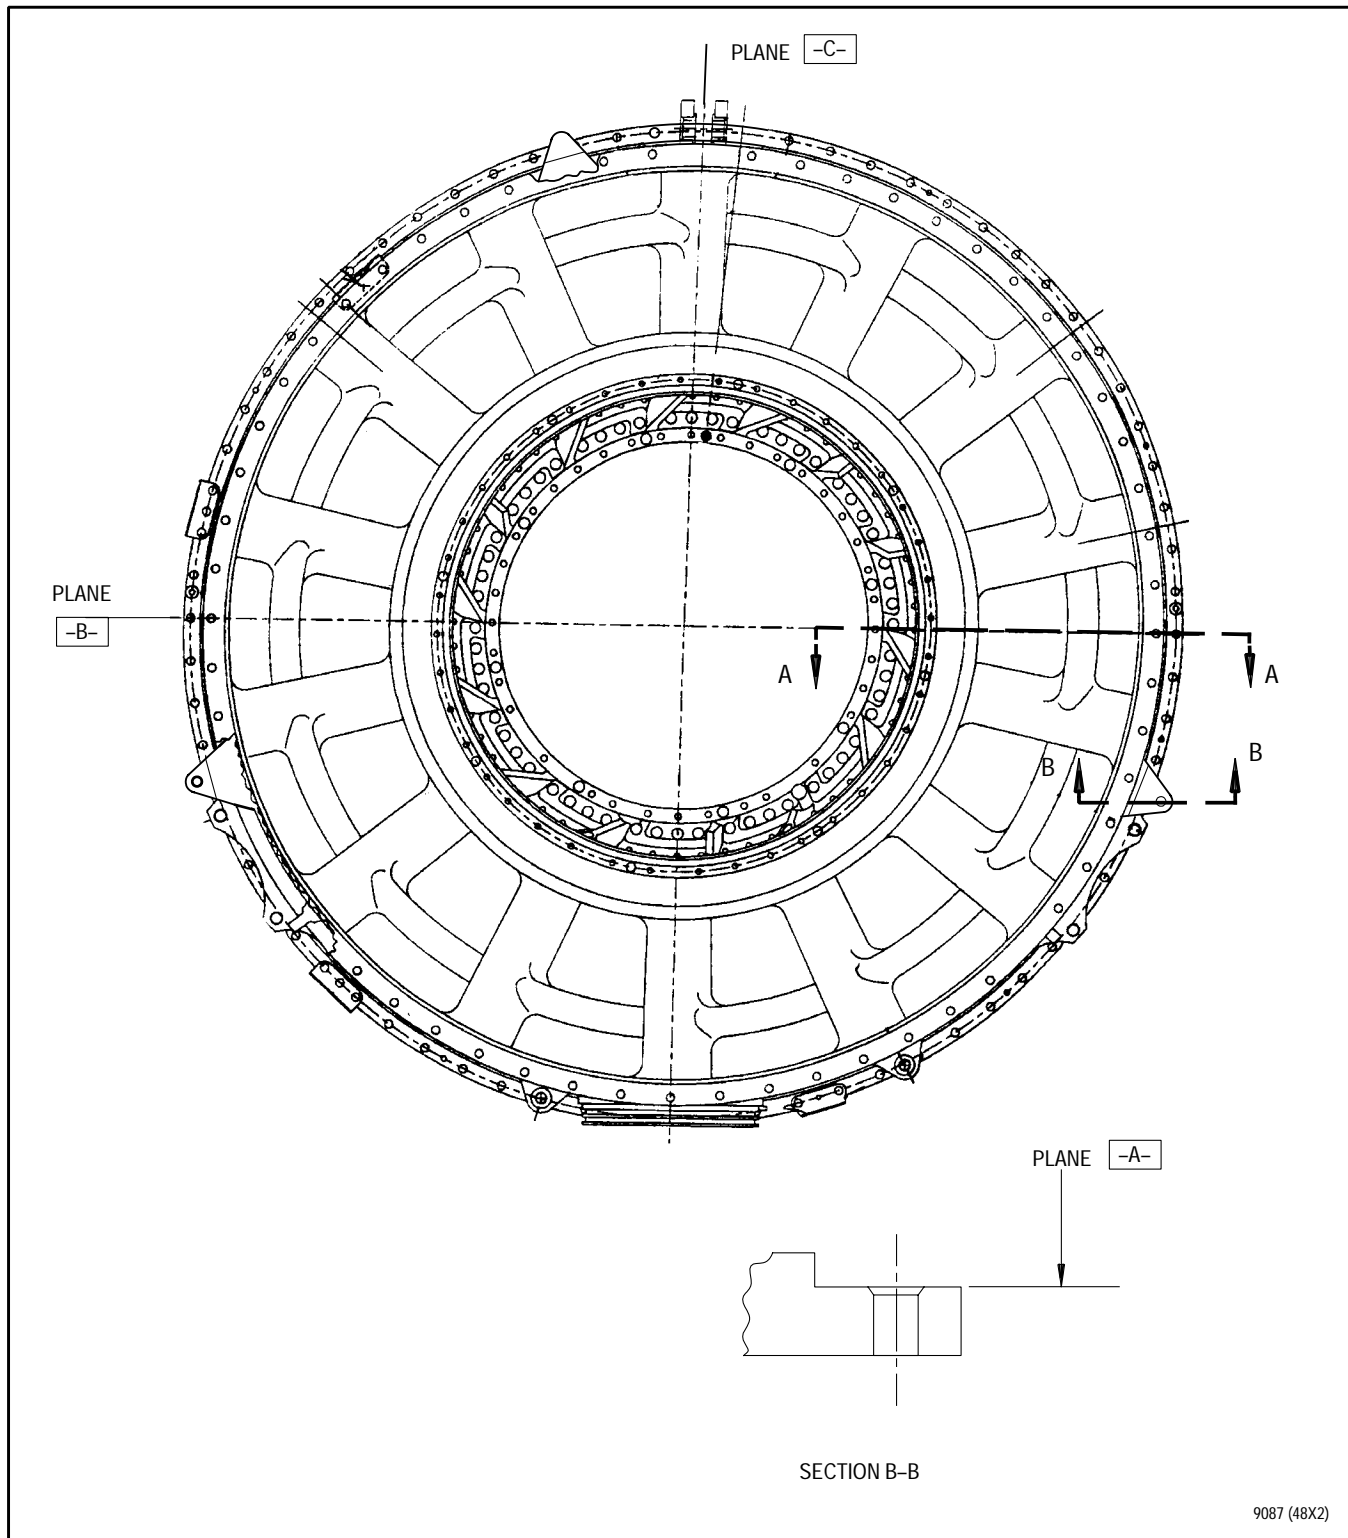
Compressor Intermediate Case Assembly - Plasma Spray Repair (Sheet 1 of 5)
